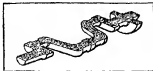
DROP FORGED CRANK SHAFT SHOWING GRAIN ARRANGED TO FOLLOW CONTOUR OF CRANK SHAFT
